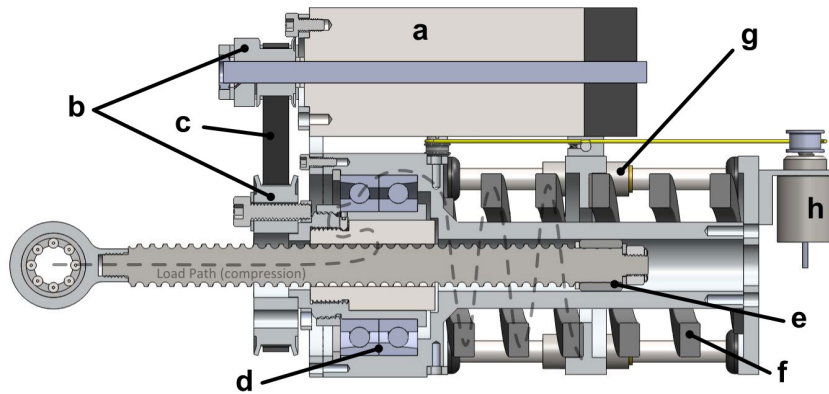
Cross section of the UT-SEA, showing drivetrain components including: a) Maxon EC-4pole 30 200W BLDC motor, b) 3:1 pulley speed reduction, c) low backlash timing belt, d) angular contact bearings, e) piston-style ball screw support, f) high compliance springs, g) miniature ball bearing guides, and h) absolute encoder. The compression load path is depicted as well.
